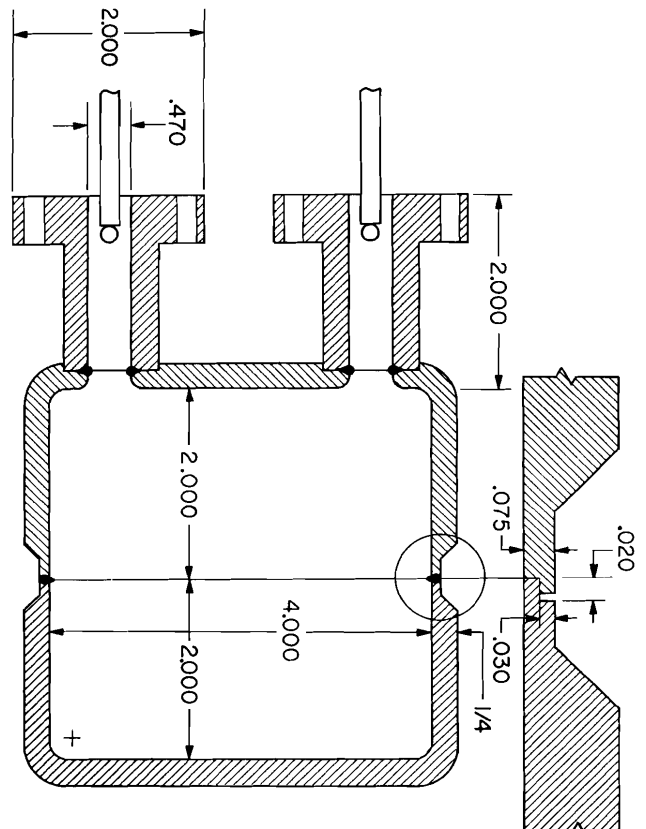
Niobium cavity with its coupling loops. Dimensions are in inches; dots represent EB welds.
